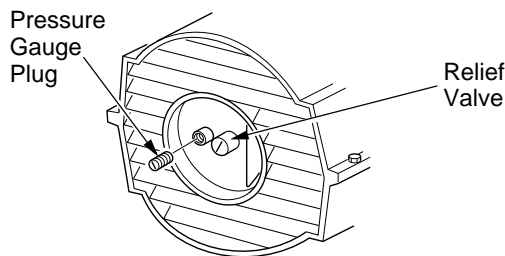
Pressure Gauge Plug Removal (40/55/60/70 Models Shown)
